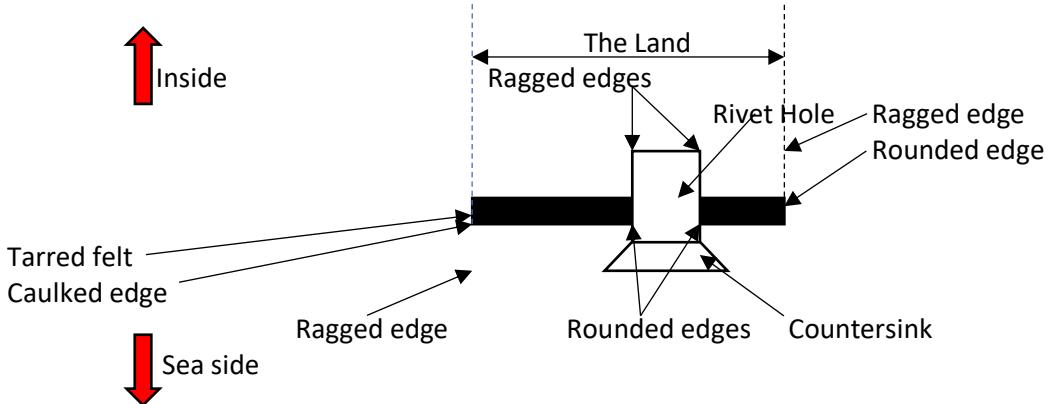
Exploded View of Shell Seam or Butt prepared for Riveting
